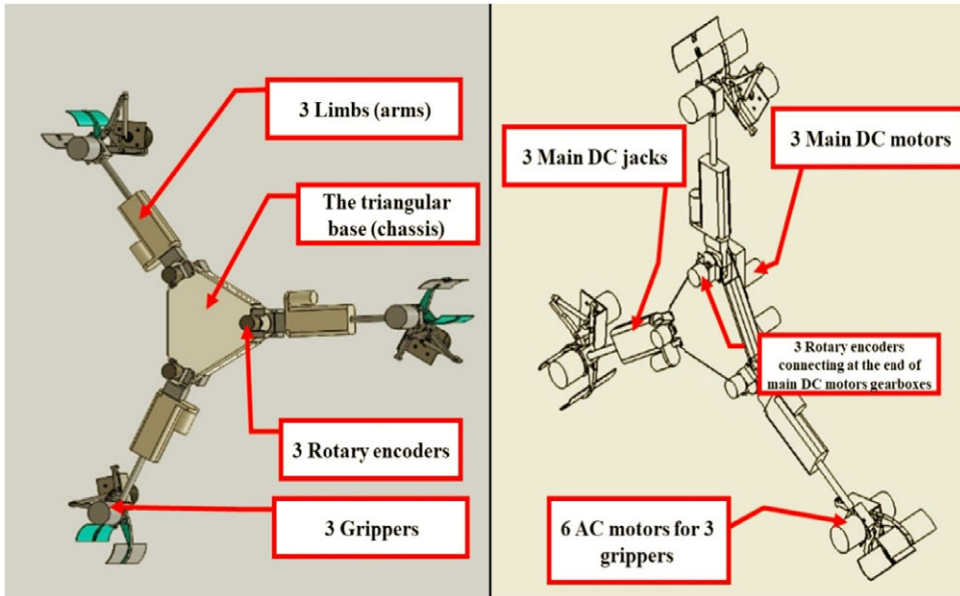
Schematic view of Solidworks CAD drawing of KharazmBot.
